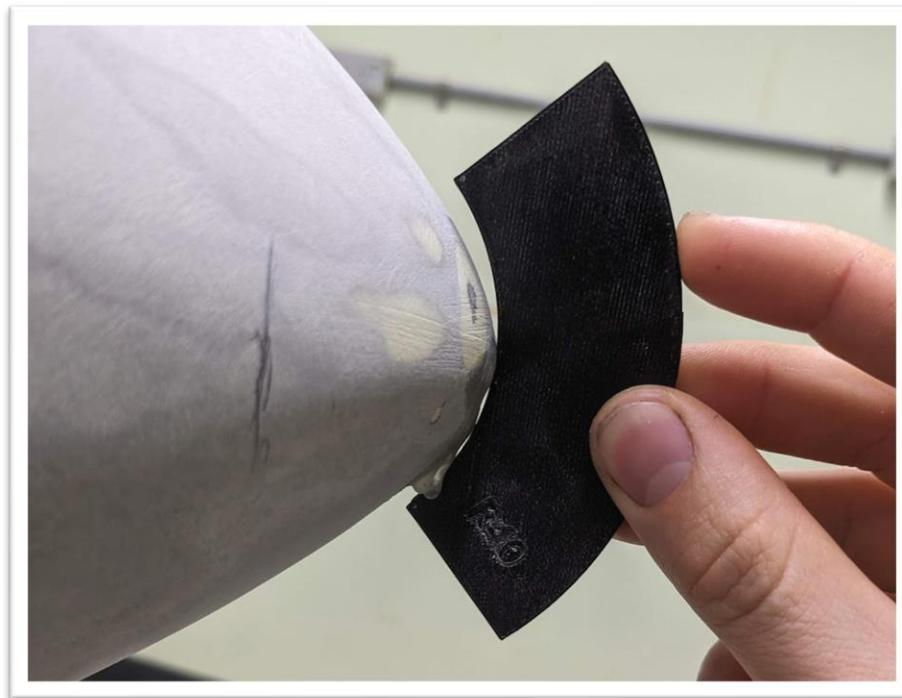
Radius gauge demonstrating issue with nosecone radius
